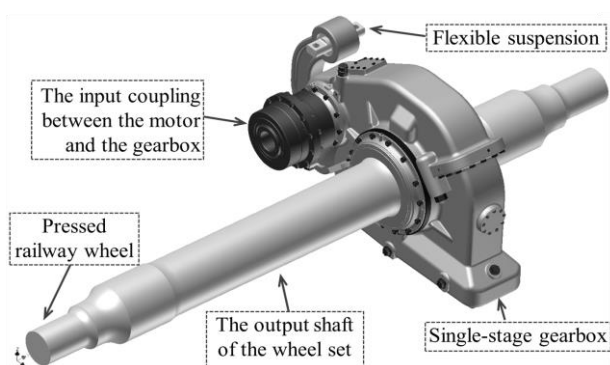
Single-stage axle gearbox with coupling and wheel-set output shaft.
